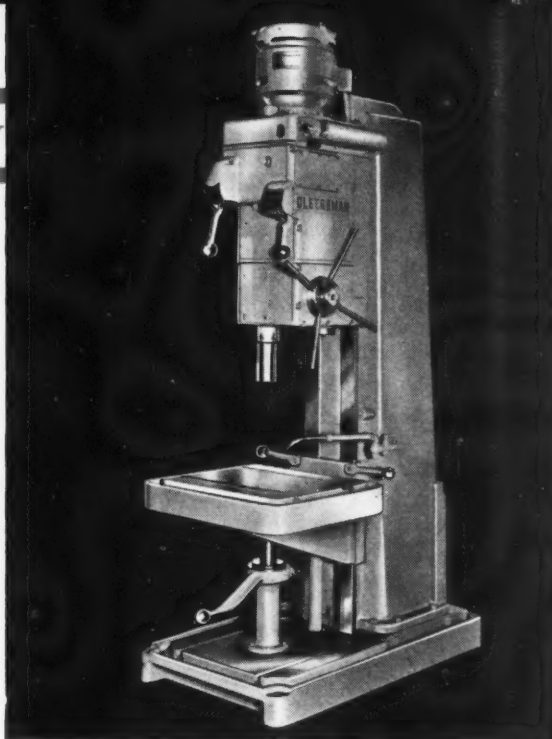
(Right) New Upright Sliding-head Drilling Machine Built by the Cleereman Machine Tool Co.
